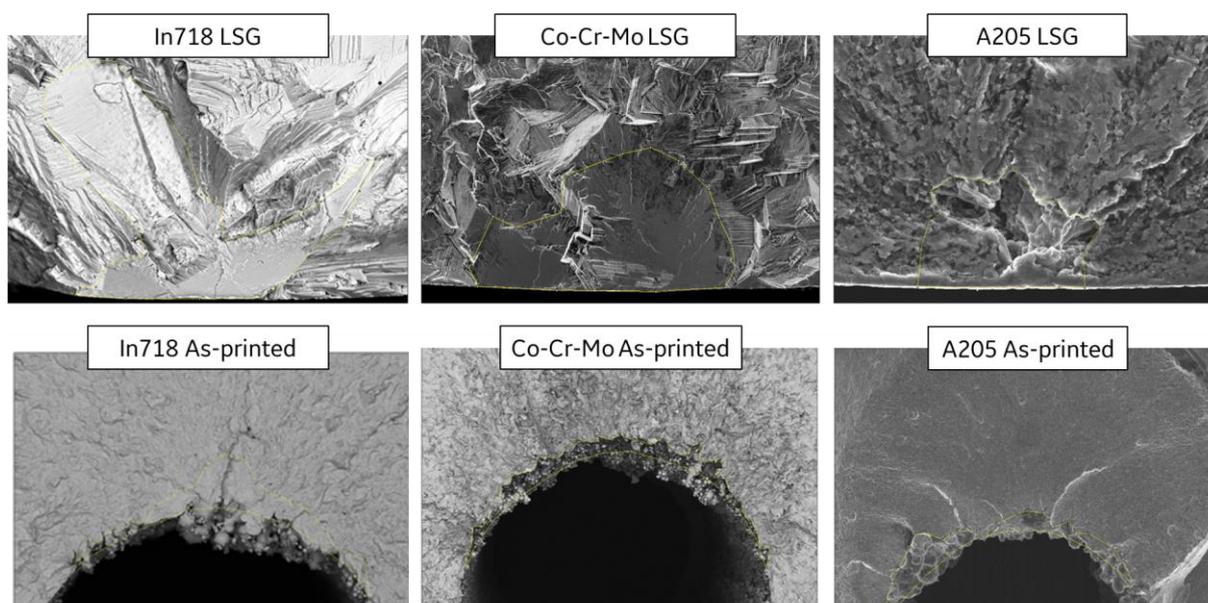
Example of anomaly size measurement on fracture surfaces of LSG and as-printed fatigue coupons.
